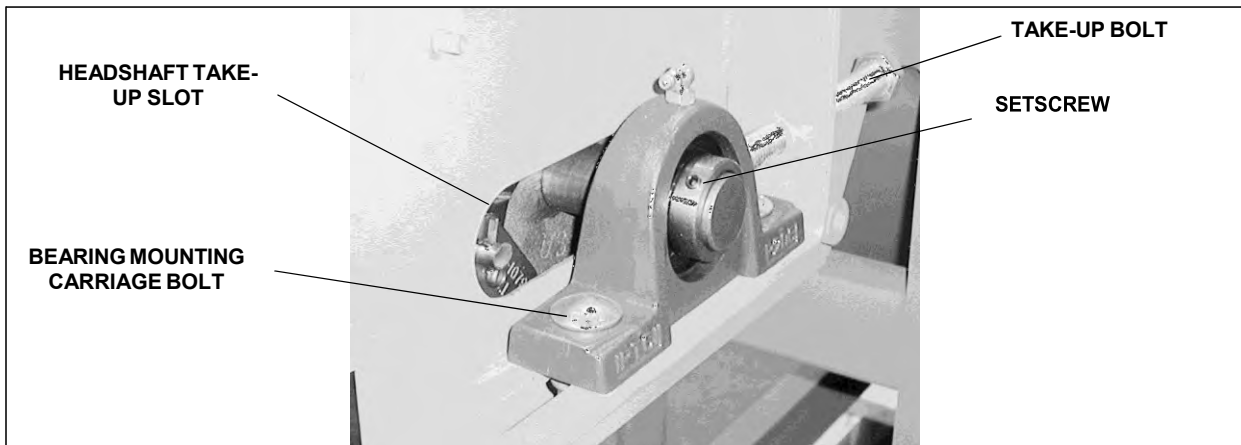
Headshaft Take-Up Slot and Flange Bearing
